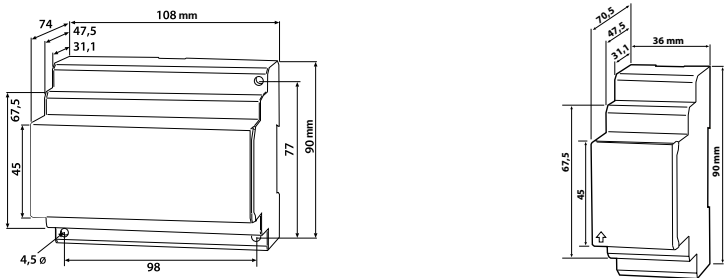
Enclosure dimensions X460 and X420 (Dim. in mm, decimal separator = ,)
